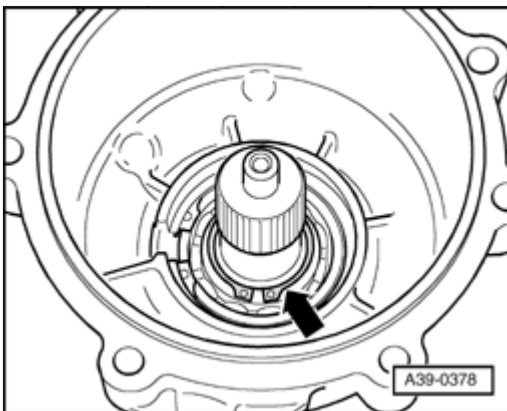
Removing/Installing Circlip On Inner Side Of Cover
